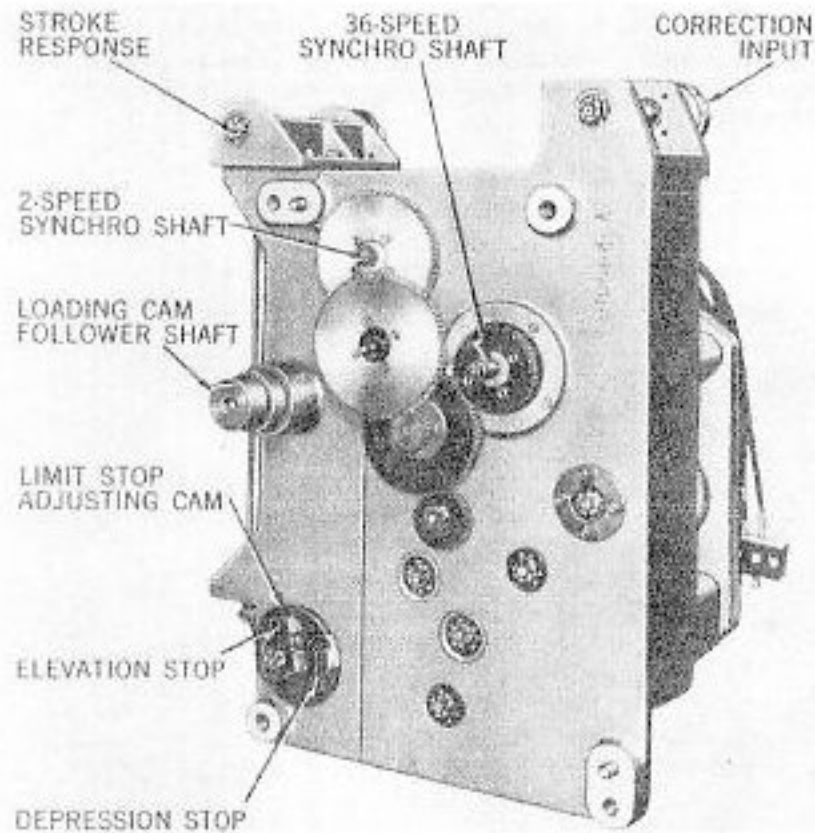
Elevation Receiver-Regulator Mk 10 Mod 0, Gear Train Assembly, Front View
